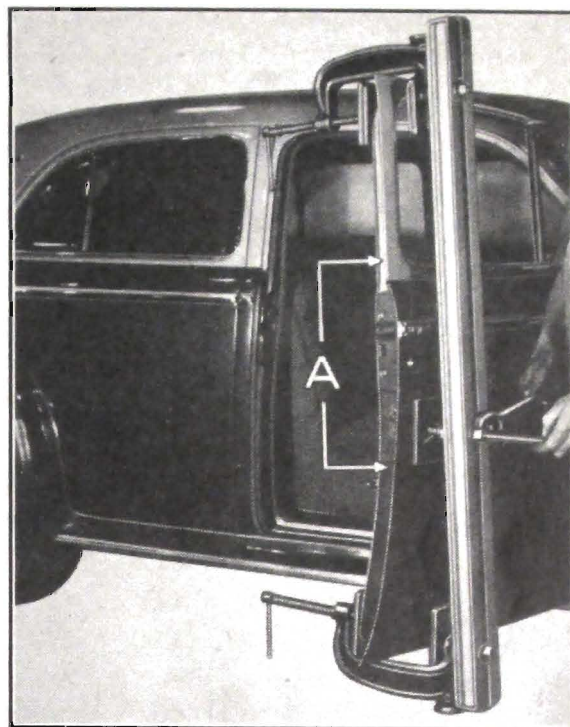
Method of Straightening Door with New Improved Door Bar
